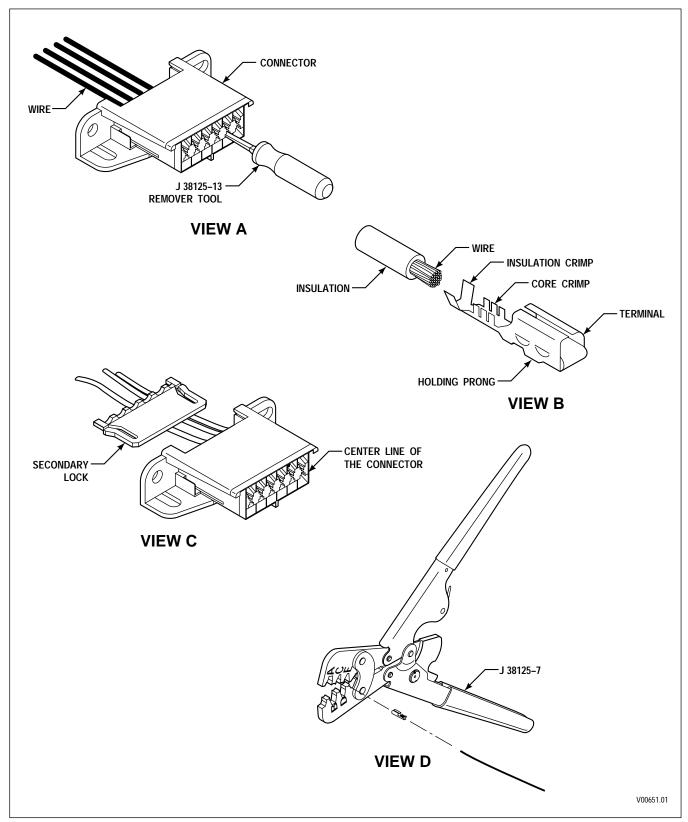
Packard Metri-Pack 280 Series Connectors — Push-to-Seat (DDR)
